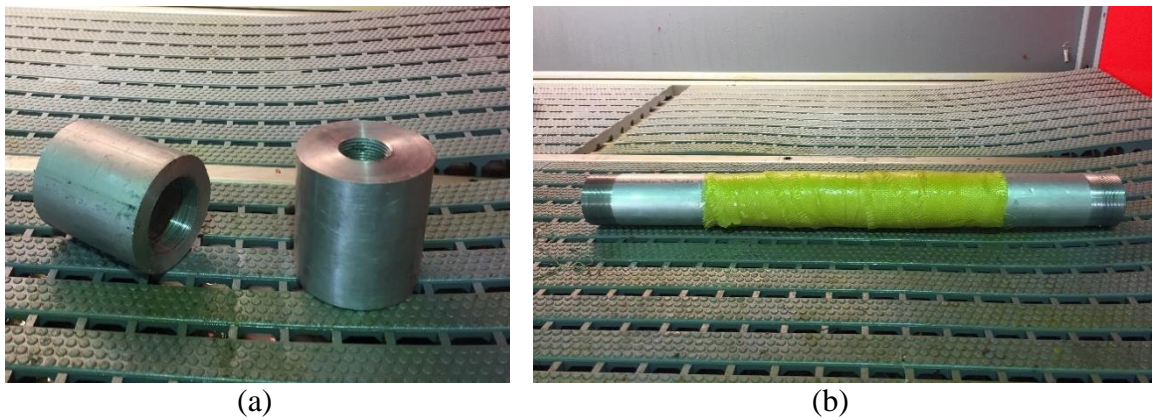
(a): Fixtures, (b): Pipe with threads.
